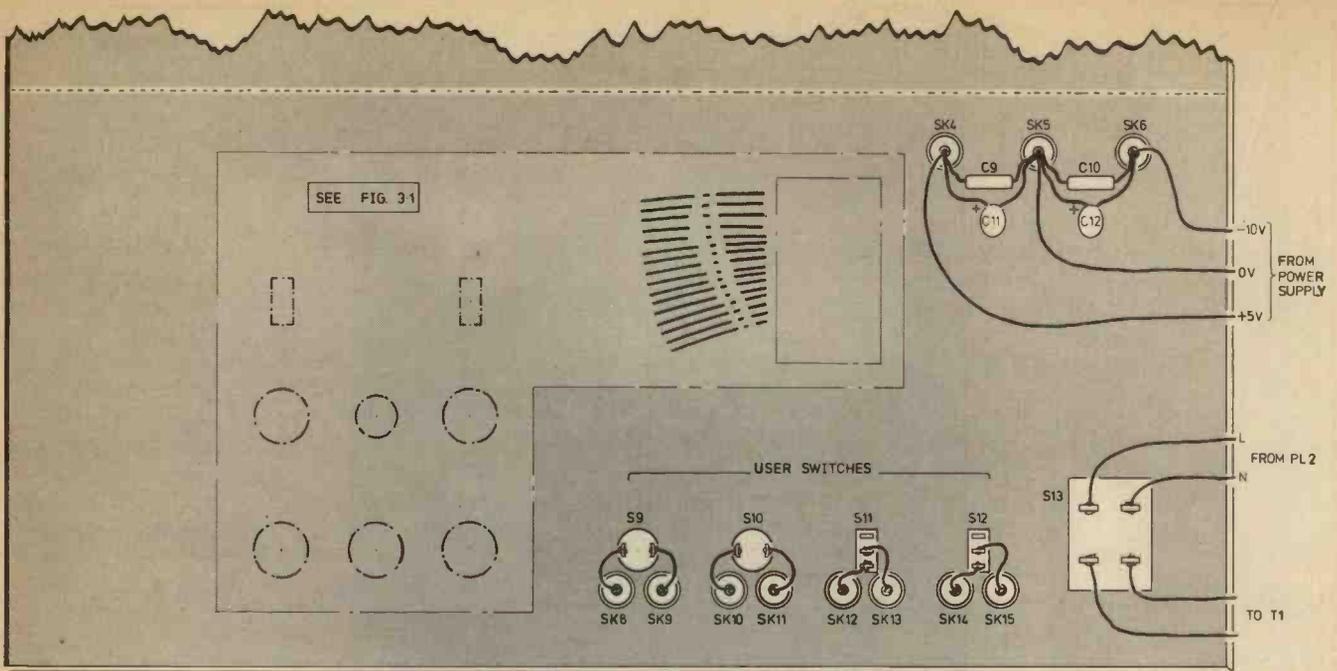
Rear view of front panel wiring. A 16-way connector (d.i.l. socket in the prototype) enables all leads from the CHAMP board to be disconnected at once. Details given match Doram type pushbutton switches
